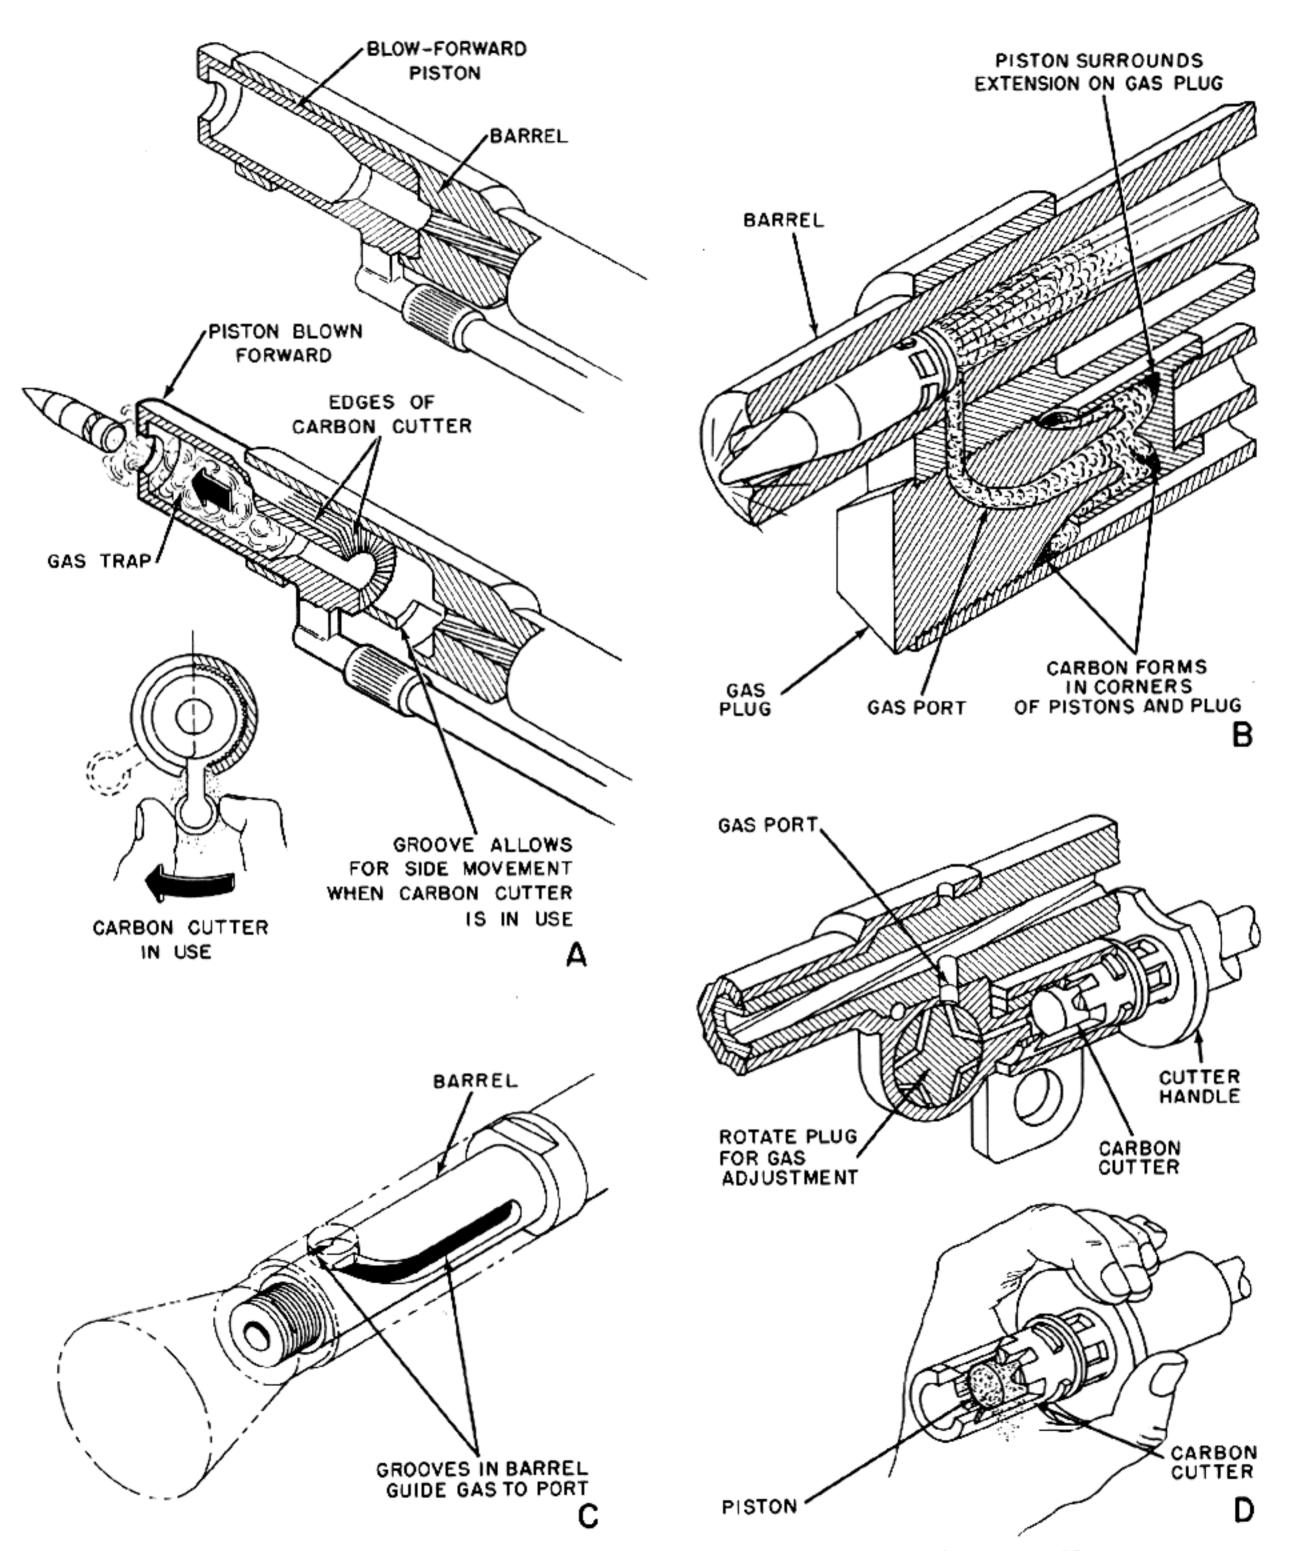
Methods of Carbon Removal and Preventing Carbon Build Up.
